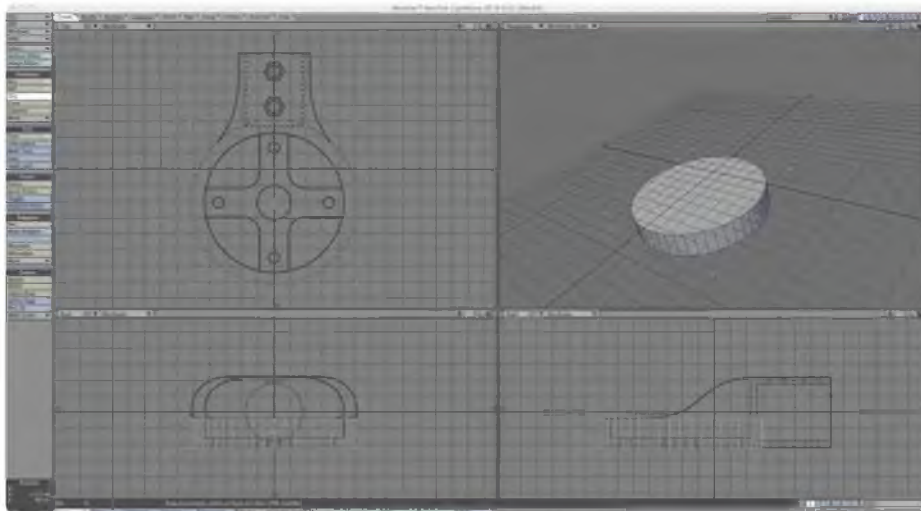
Top, end and side view drawings of a motor mount have been loaded into the viewports, and are used as guides when making the 3D model
